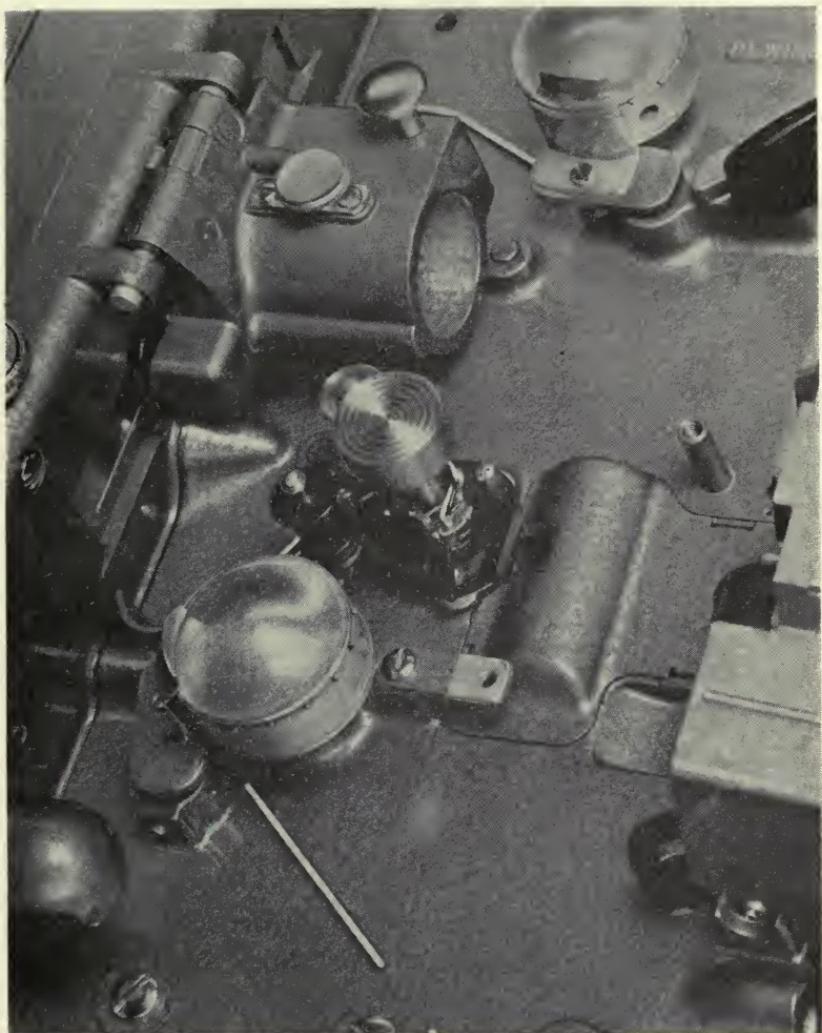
Head and mounting assembled in place on the Model 400 projector. The sound drum was withdrawn slightly in order to obtain a better view.
